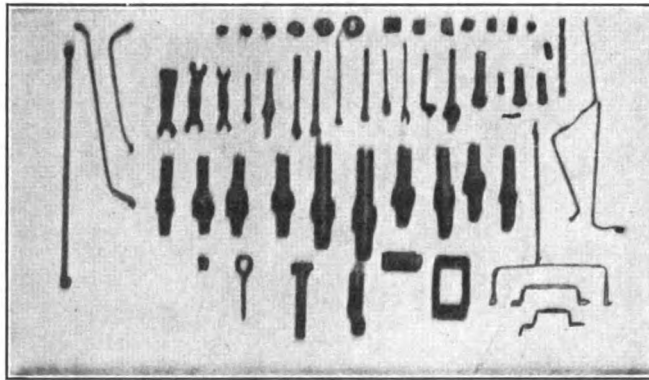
THERE IS A POINT WHERE MACHINE FORGING BECOMES EXPENSIVE
